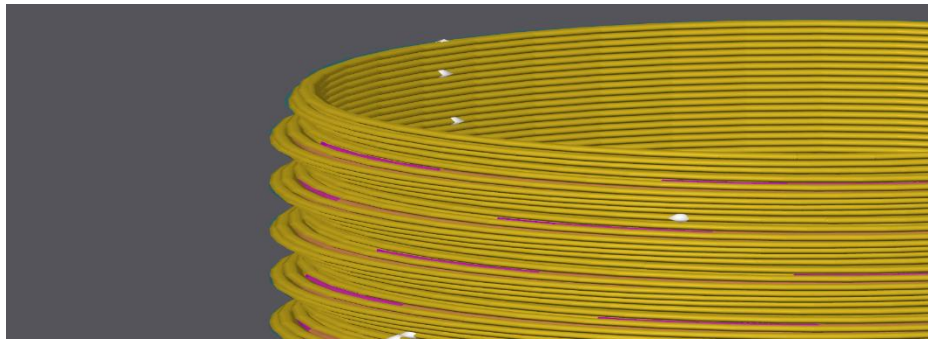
Close-up view of printed thread geometry illustrating line width, layer resolution, and thread fidelity achieved using a 0.2 mm nozzle.
